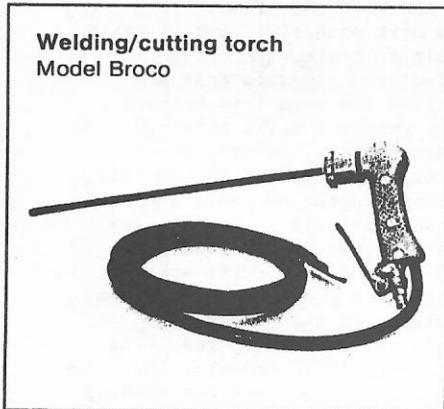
Broco model combined under-water welding and cutting torch
